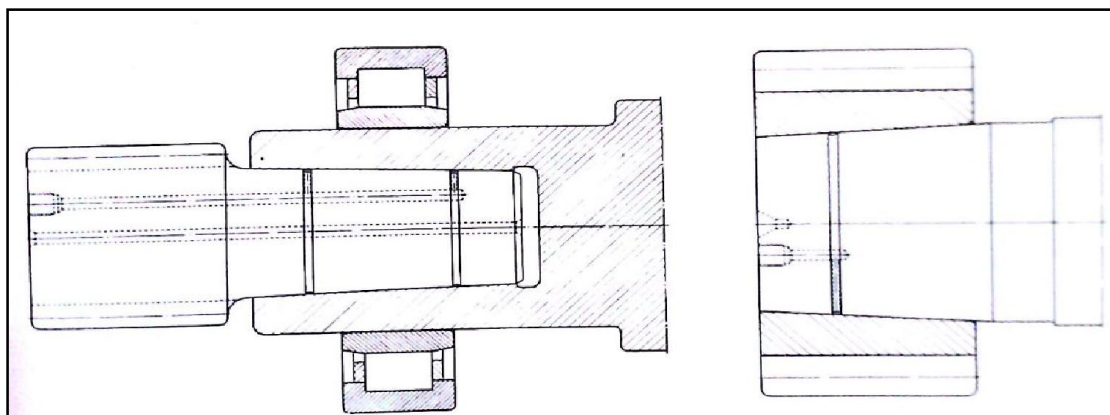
Pinion drives for traction motors showing oil injection grooves.
